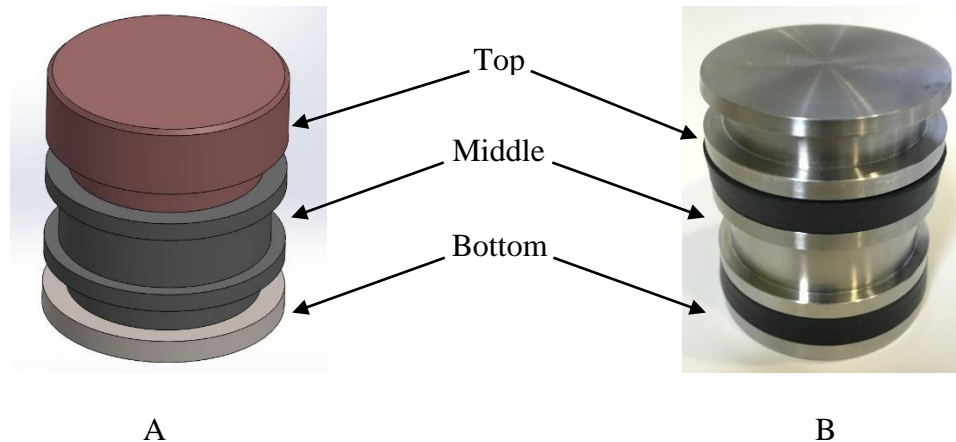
A) model of piston assembly with flat geometry B) creviced piston assembly uni-directional piston rings
